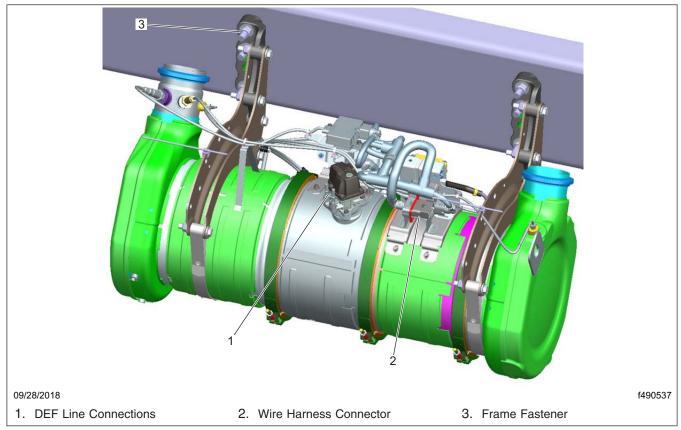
, Understep Aftertreatment Assembly (SF561-C and SF561-F)
